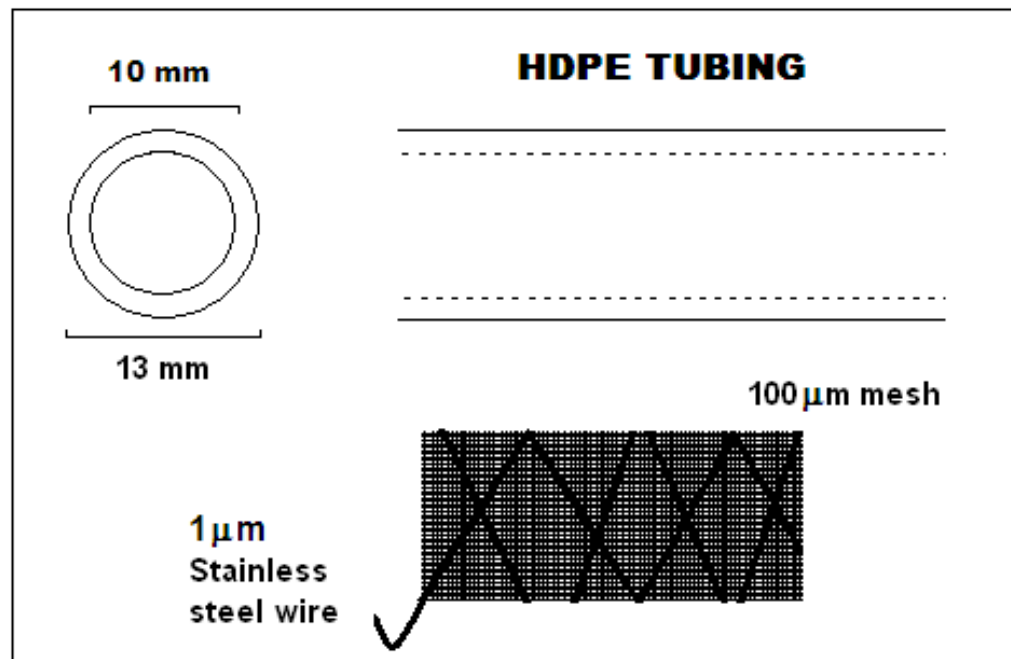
Construction materials for MDPs & dimensions of HDPE tubing
